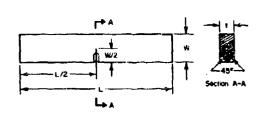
SLOW BEND FRACTURE TOUCHNESS SPECIMEN
